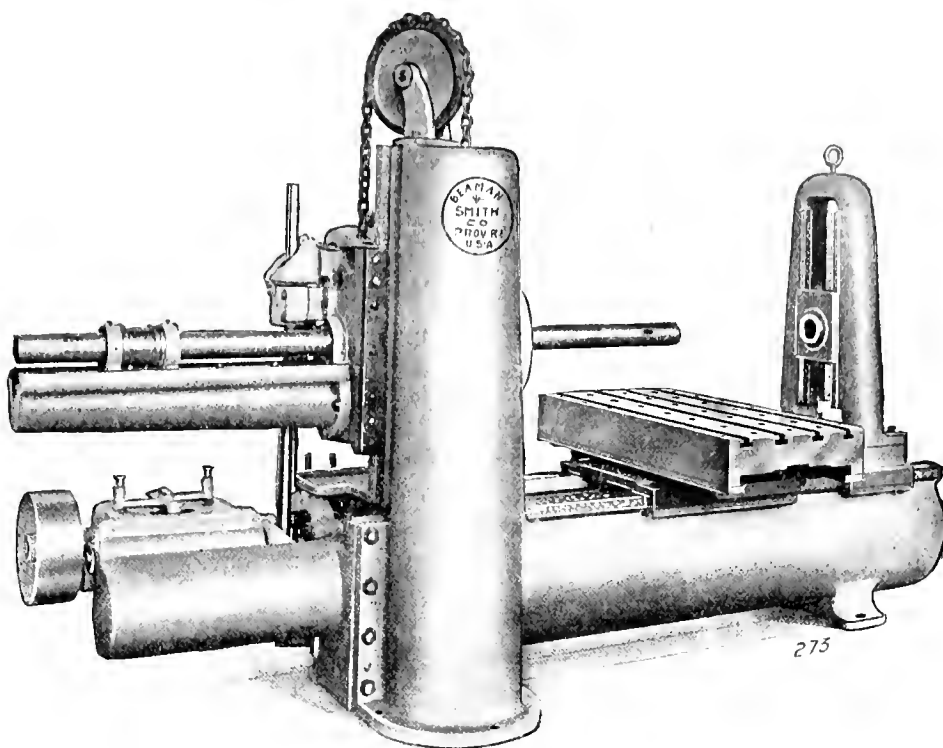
Rear View showing Tubular Section used throughout in the Construction of Machine Members
